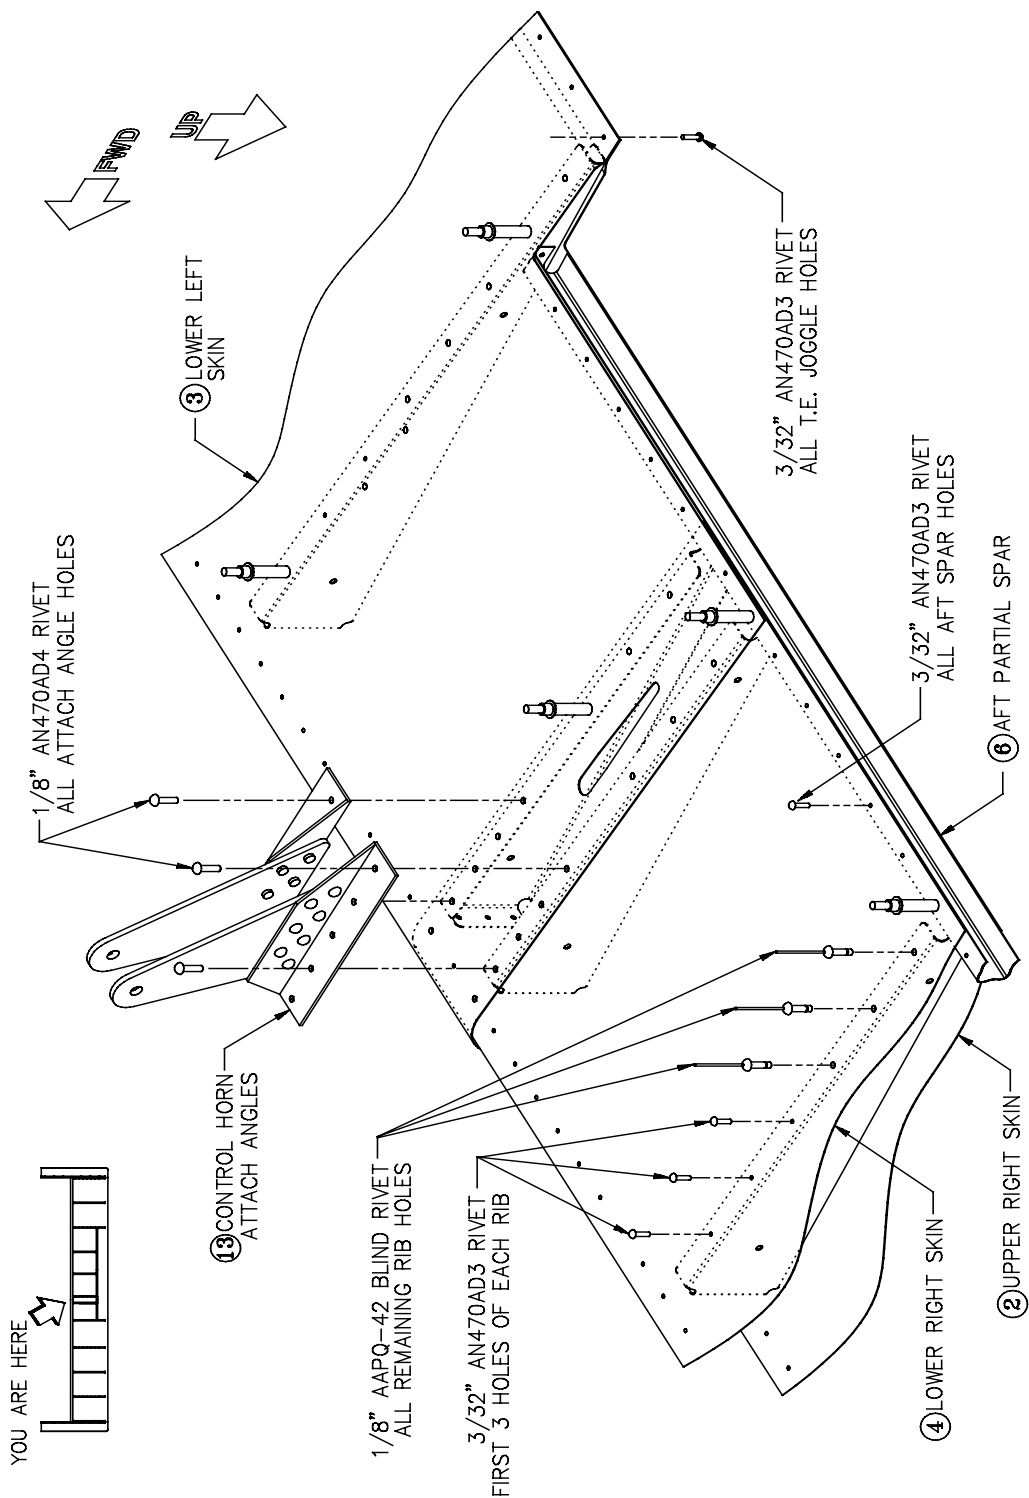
Riveting the Control Horn Assemblies and Lower Skins to the Ribs and Aft Partial Spar
